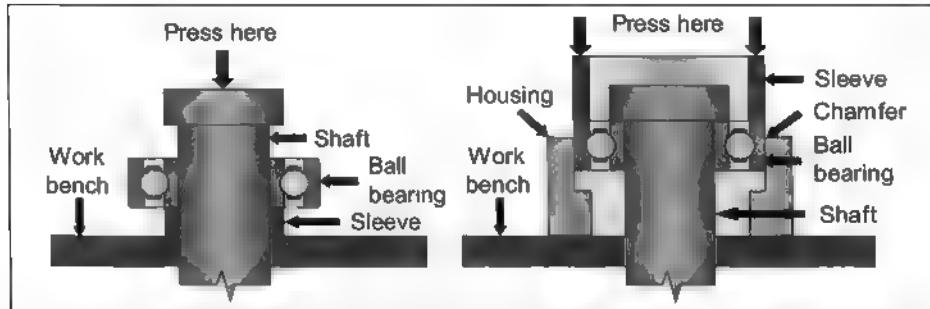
Left, how to fit the shaft to a ball bearing by supporting the inner bearing ring while pressing on the shaft; right, fitting a bearing on a shaft into the bearing housing by pressing against the outer ring. The same approach should be taken with roller and needle bearings.
